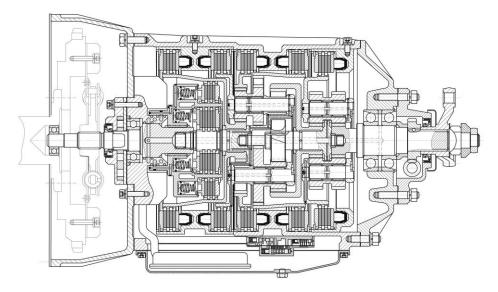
The design of the eight-speed planetary gearbox on the basis of universal multi-threaded differential mechanism
